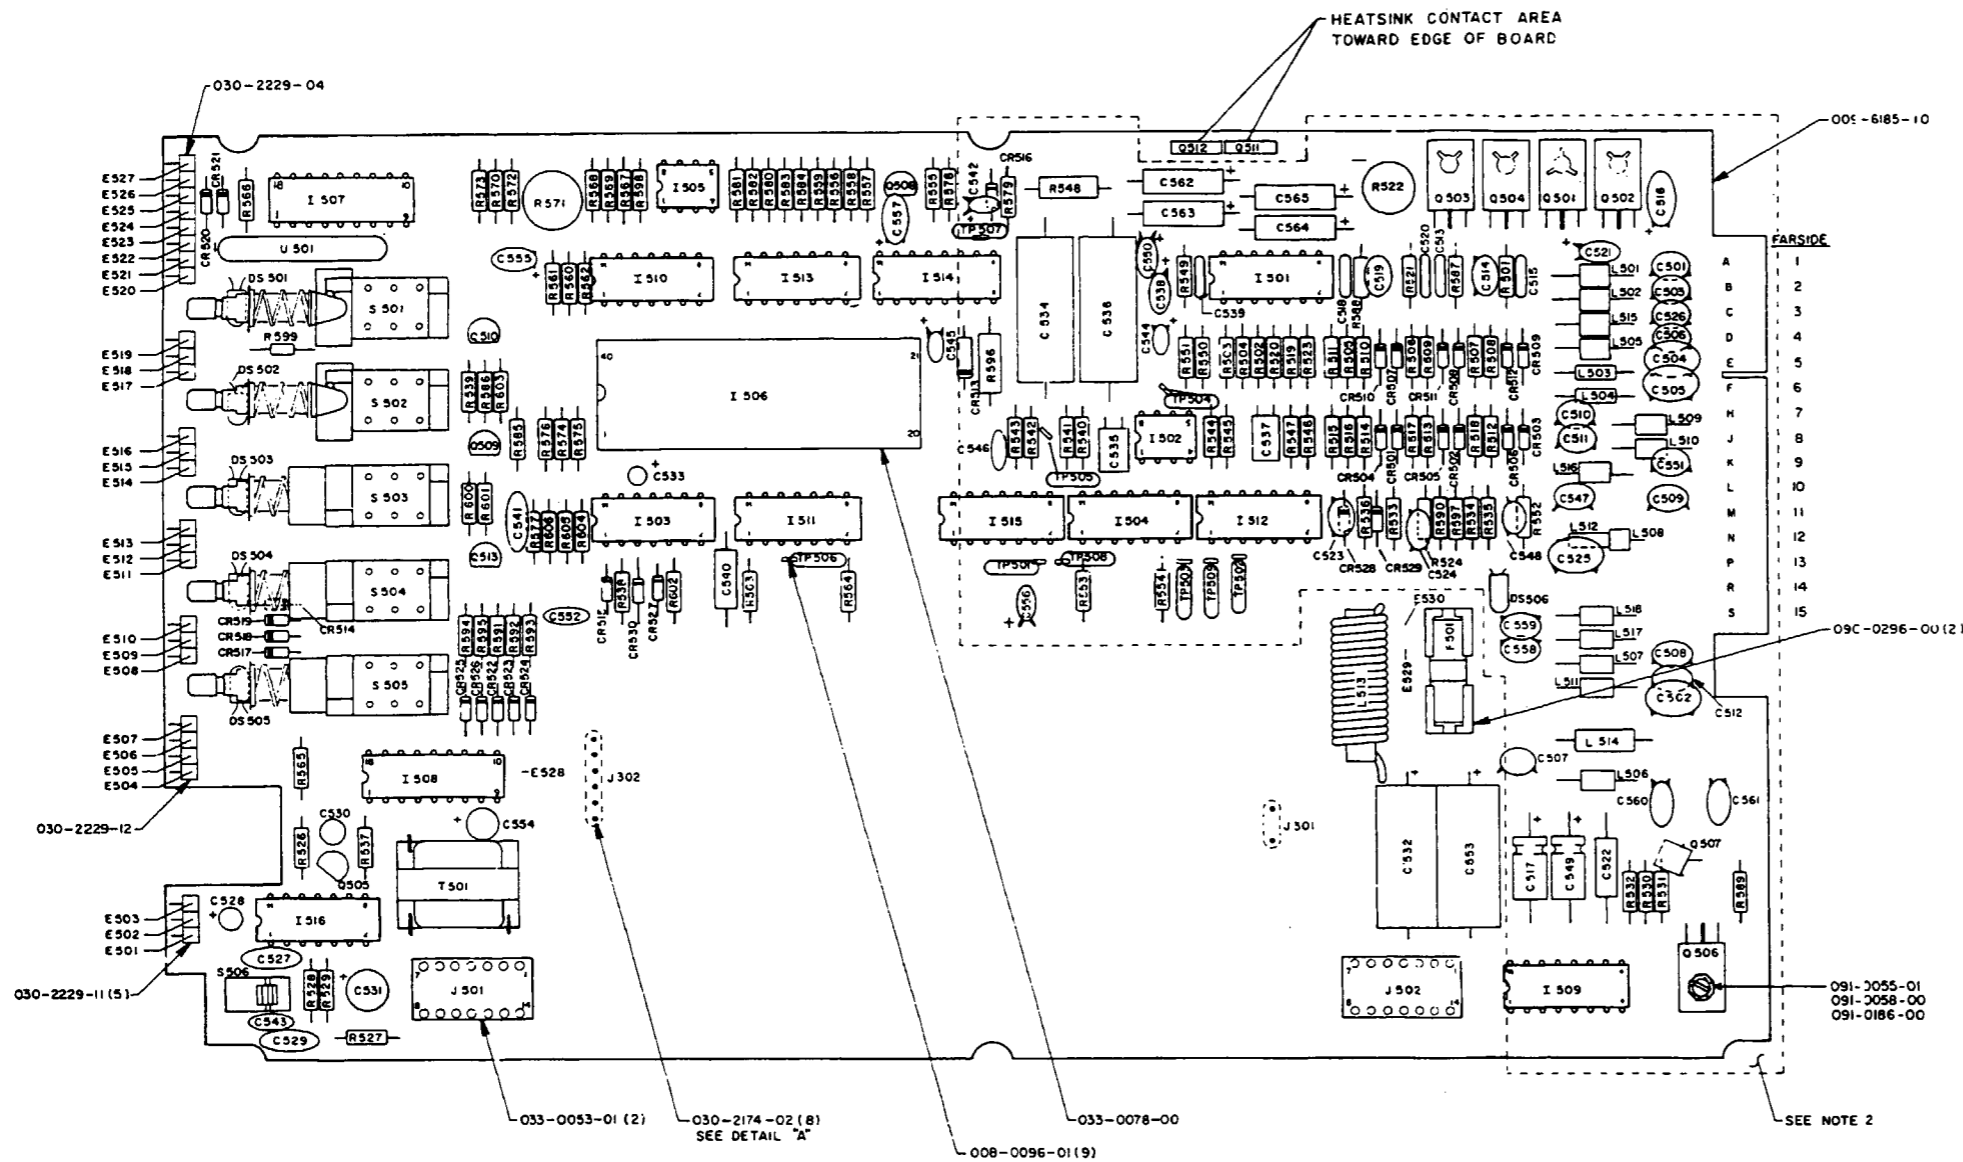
KR 87 MAIN BOARD ASSEMBLY
